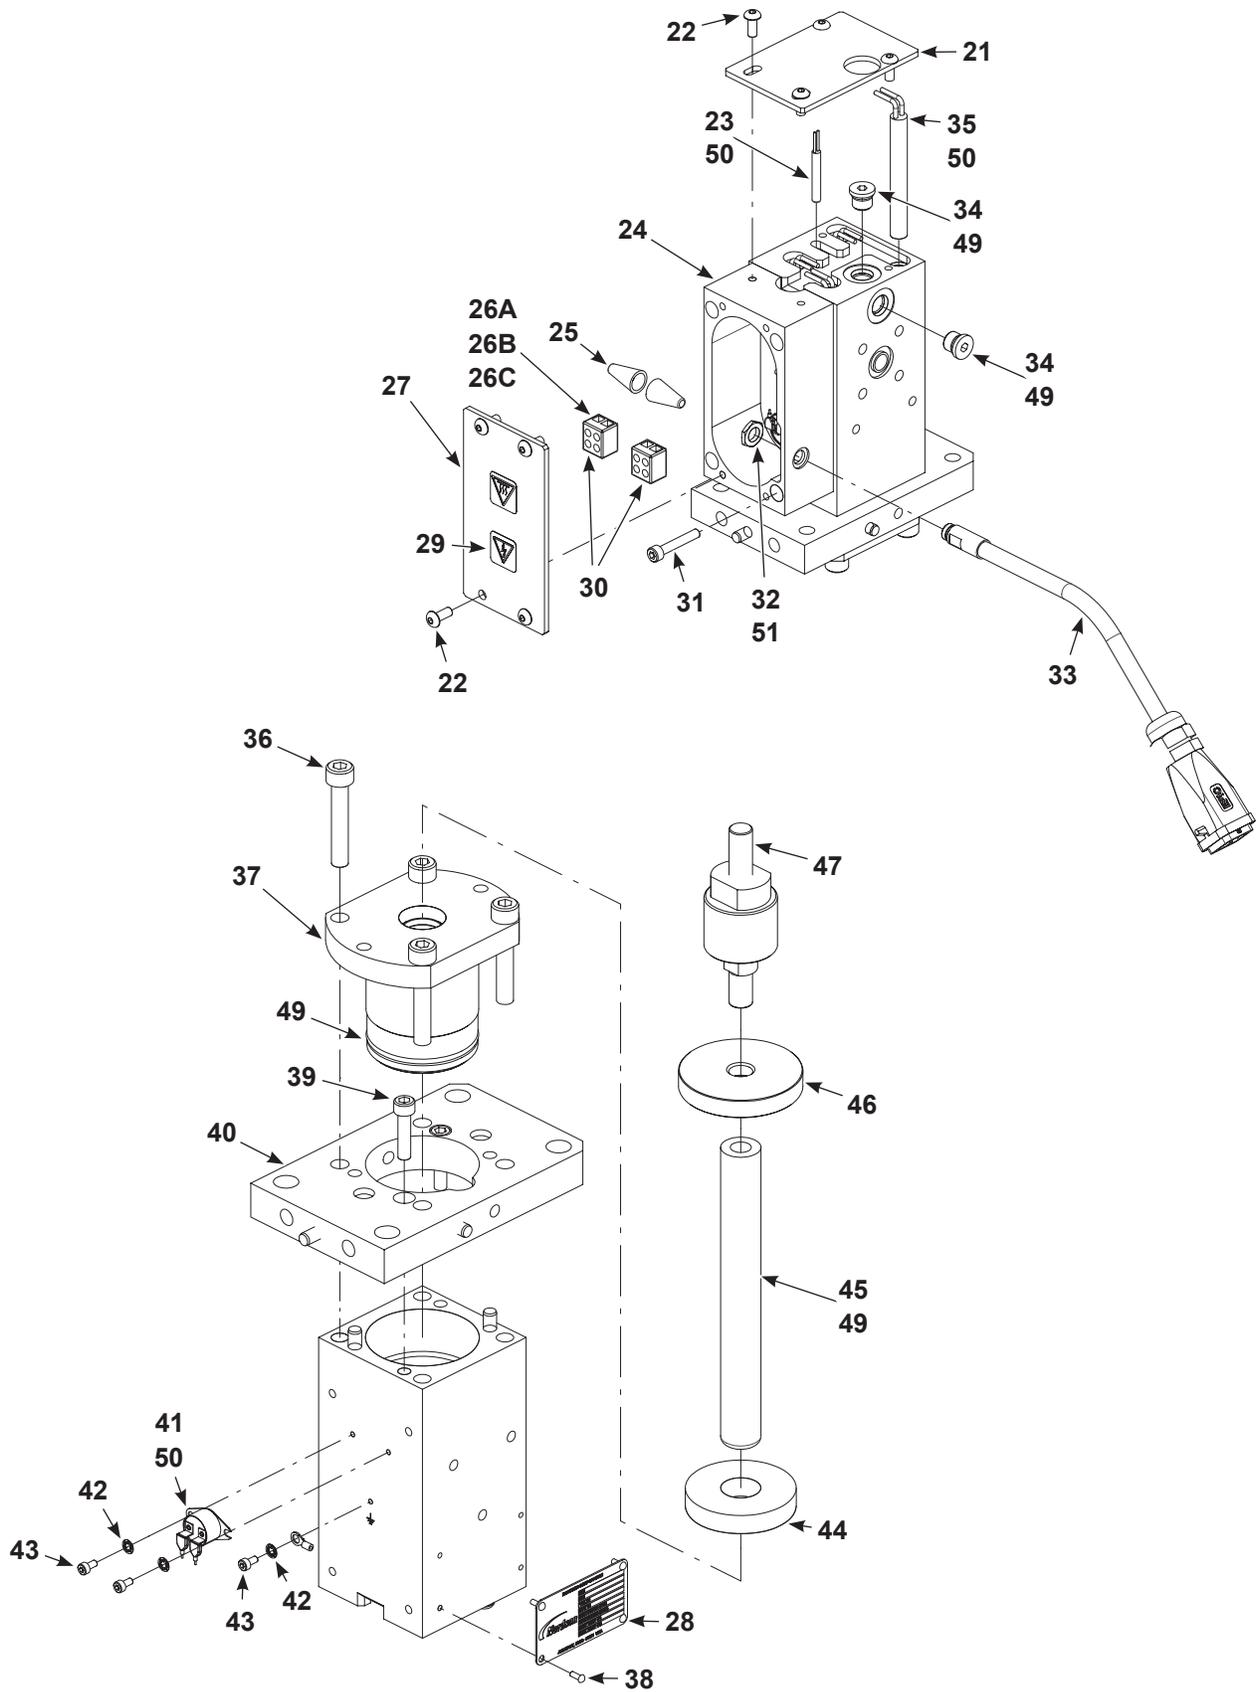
S35 120 Volt Heated Dispenser Parts (Continued)
